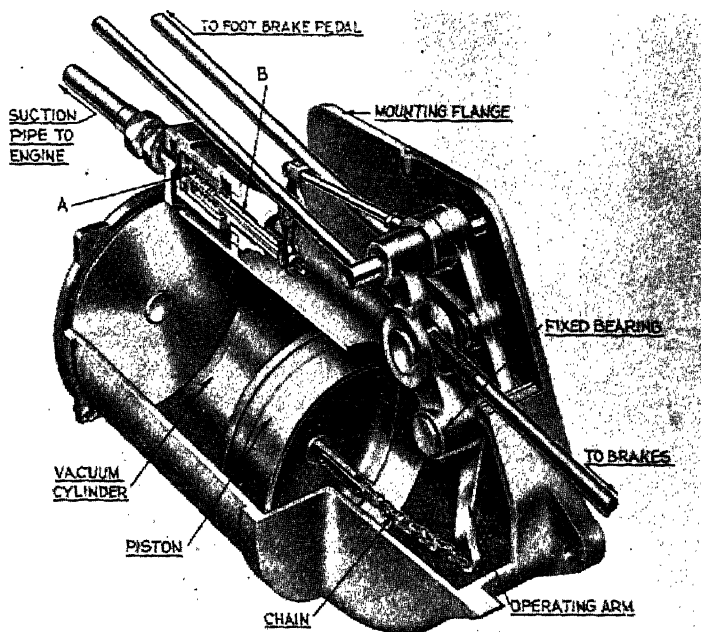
Dewandre Vacuum Brake Cylinder Unit.
